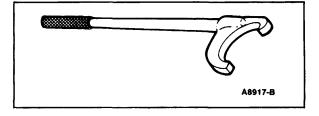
T83T-9000-C Injection Pump Rotating Tool
